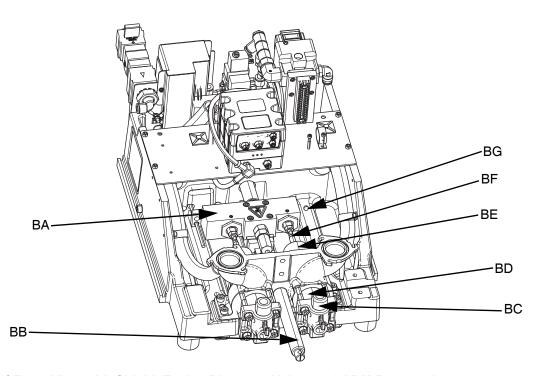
PR70f Front View with Shield, Tanks, Dispense Valve, and ADM Removed
